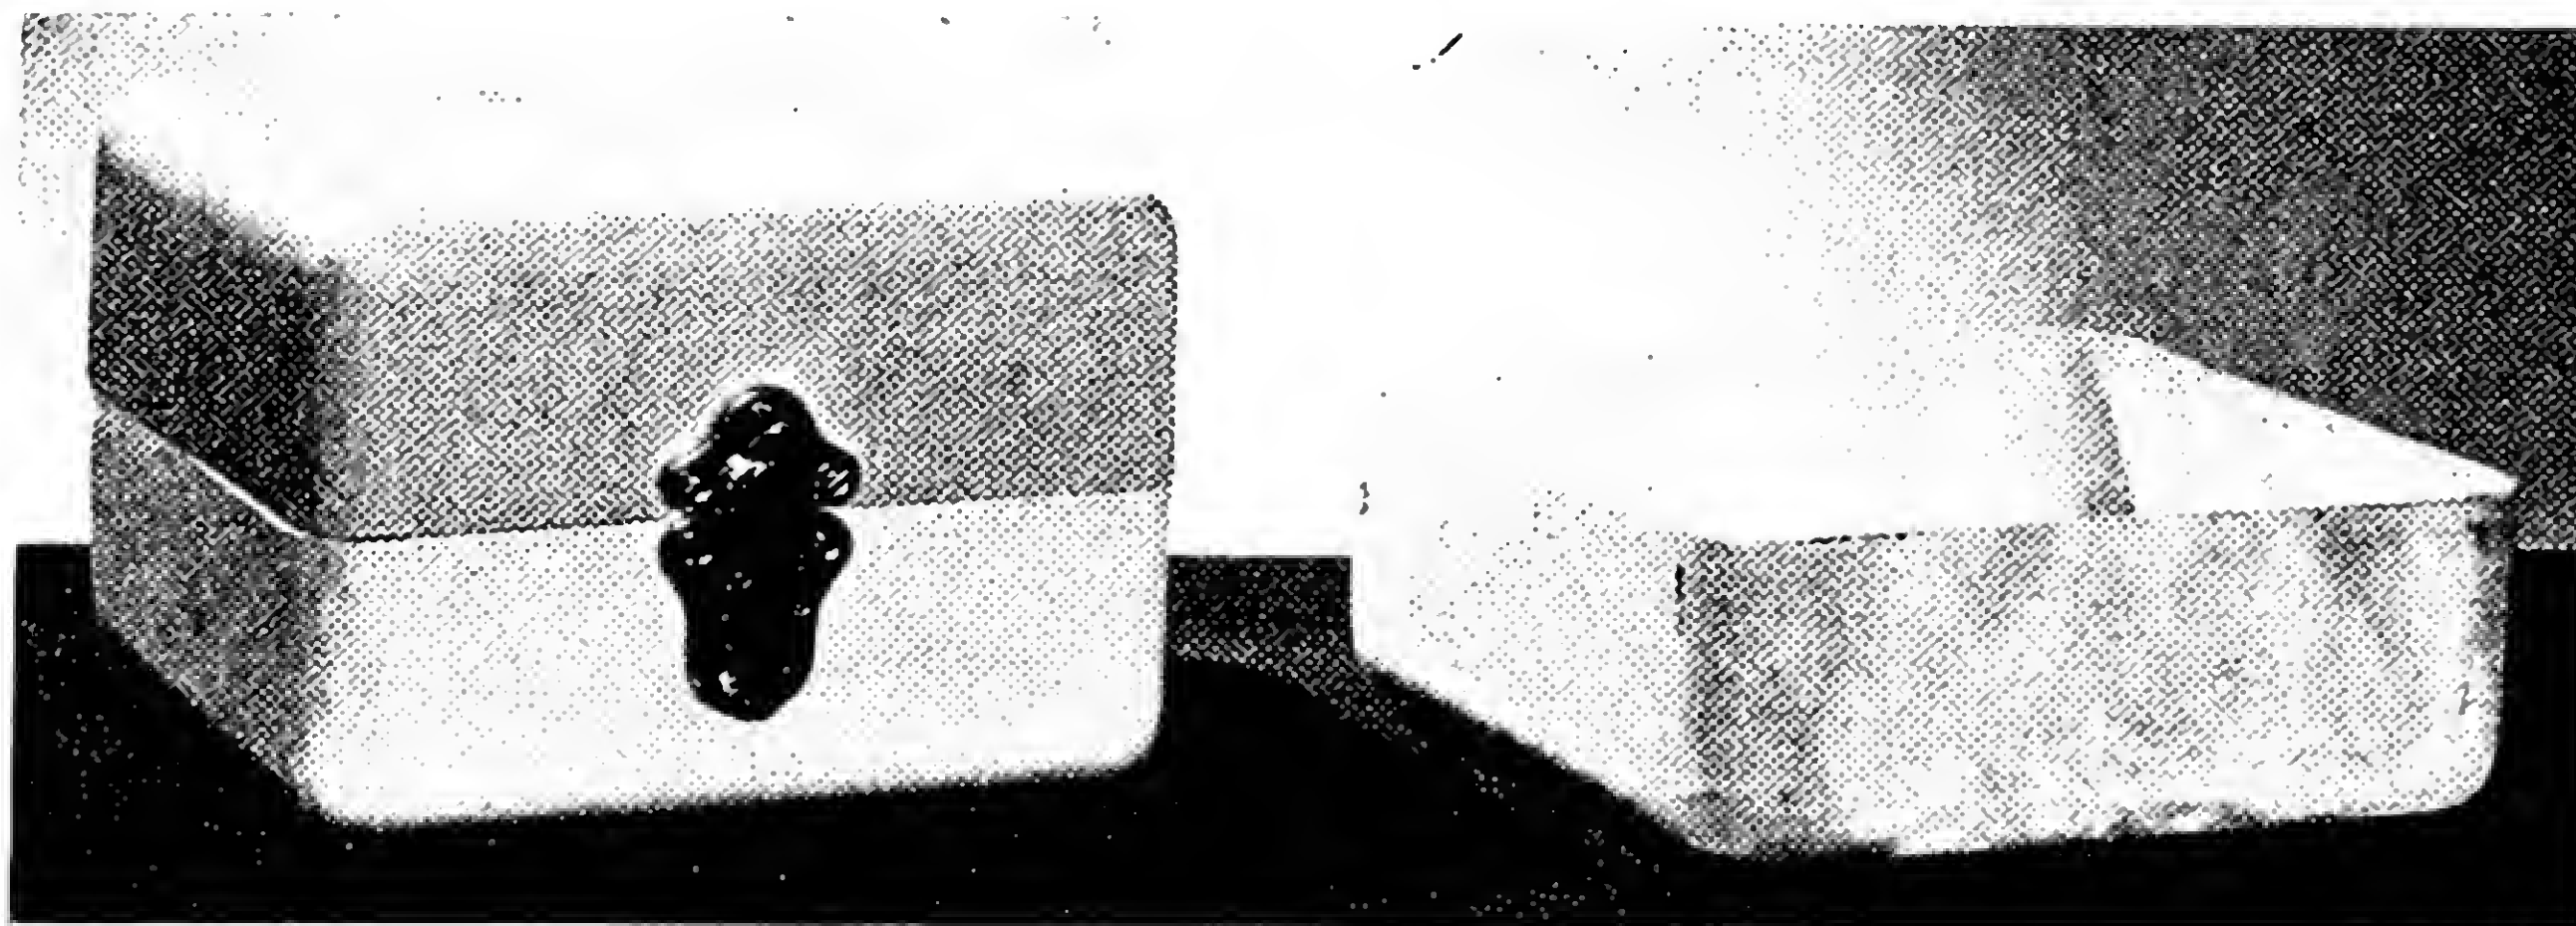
Box after trimming. Two such boxes have been assembled, with hinges and a lock to make the container shown on the left.
